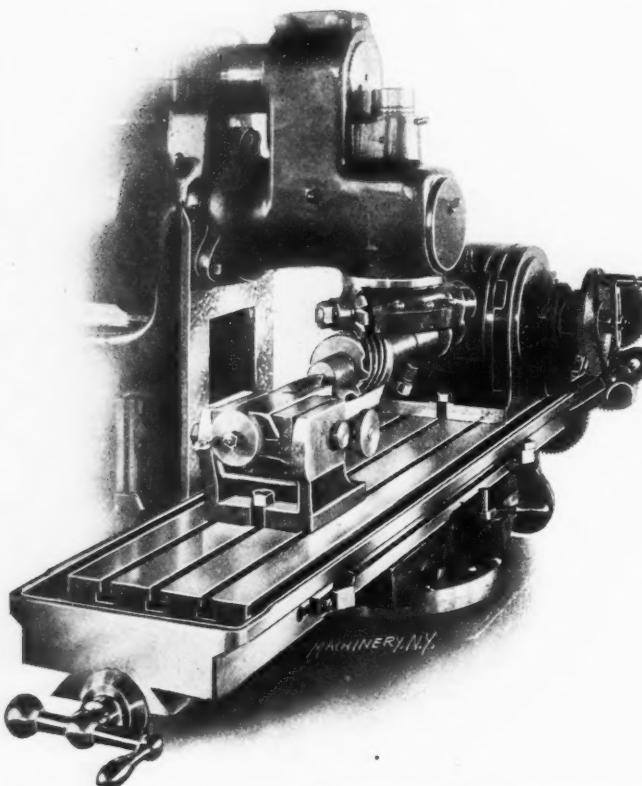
Universal Milling Attachment of the Cincinnati Milling Machine Co. in use Cutting Gears of Large Helix Angle.
